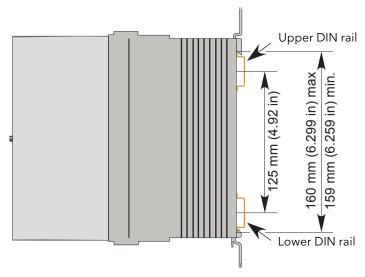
DIN rail mounting details for 80A, 100A and 125A units
